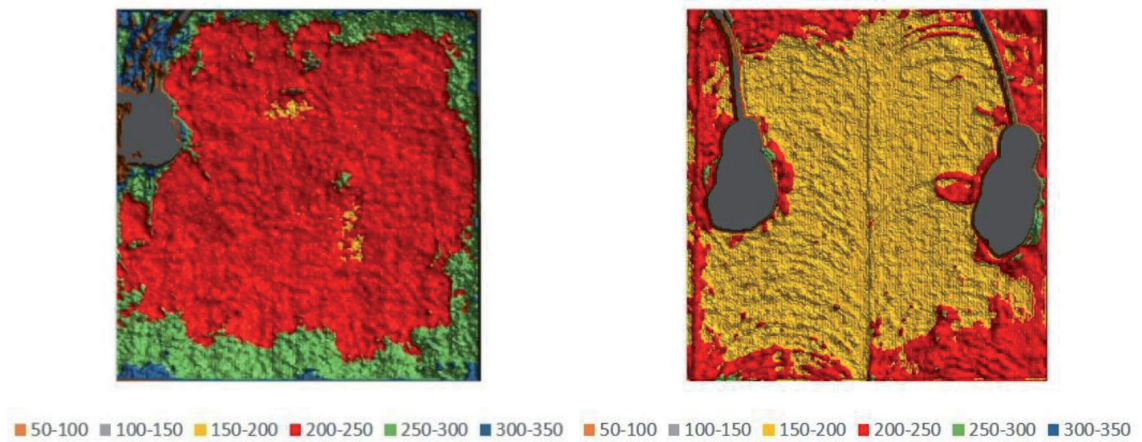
3D IR images of B_1 workpiece (left) and B_4 workpiece (right) at the temperature of 200°C.
